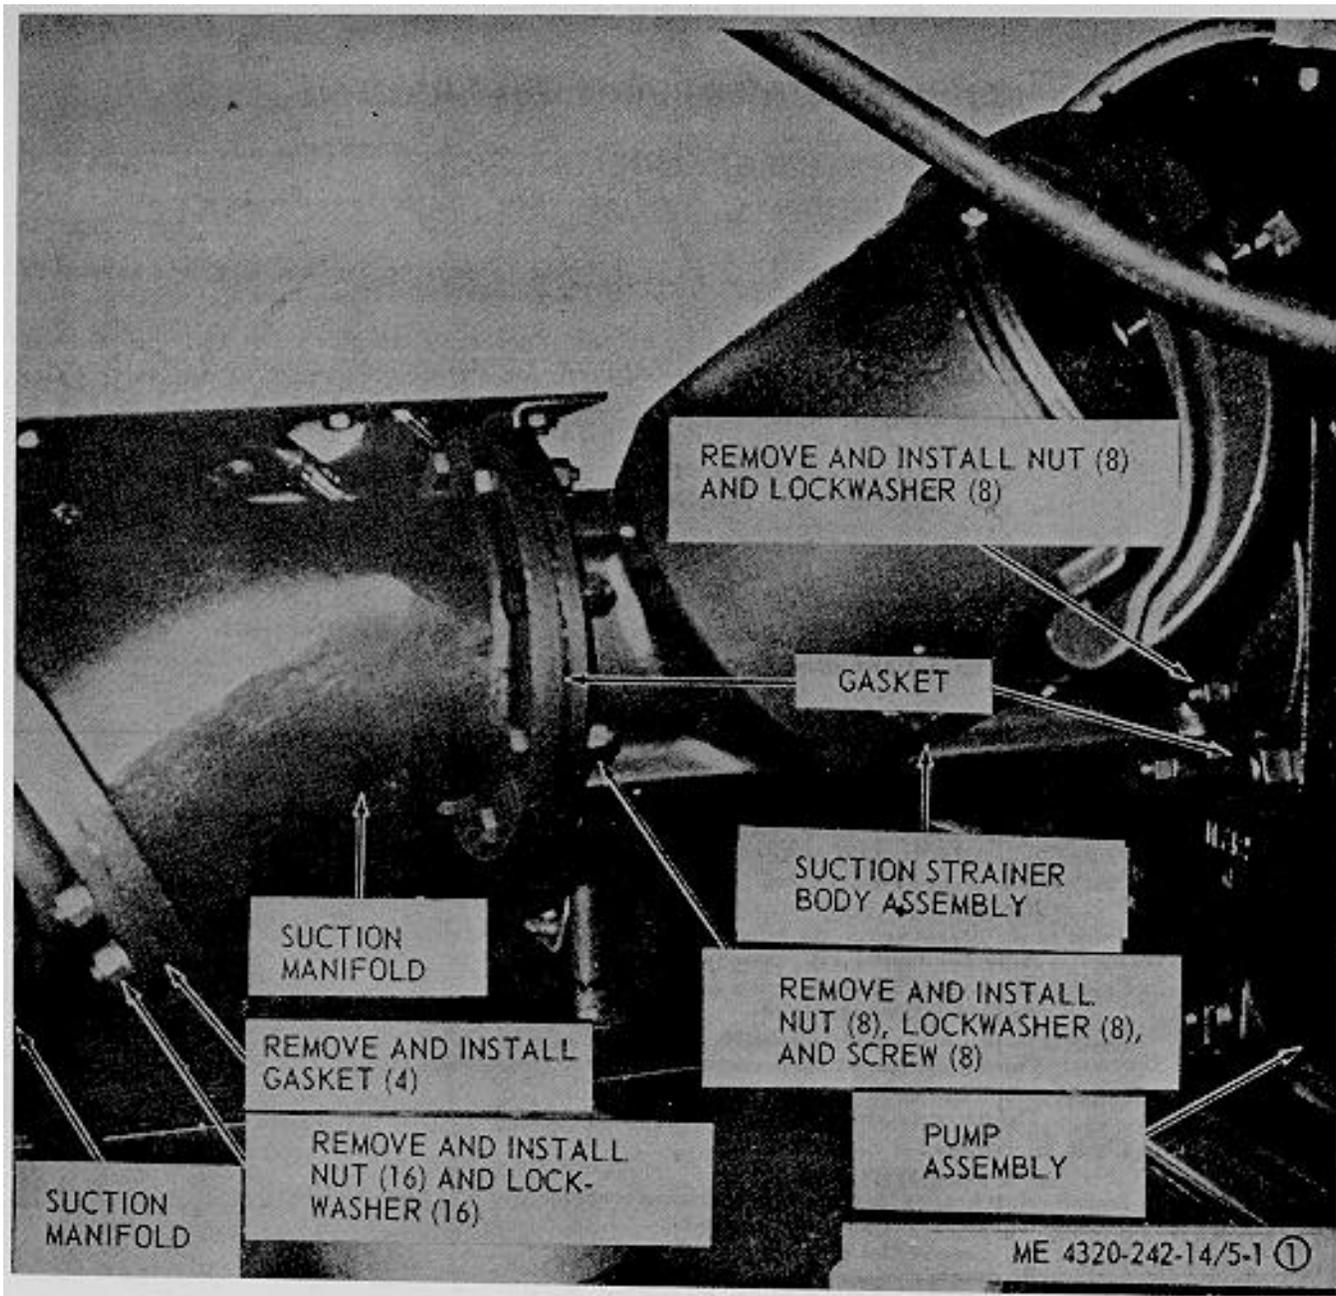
Suction manifold and strainer body assembly. removal and installation. Model 84C15-A0484, serial numbers 371201 through 415493 and Model US36ACG, serial numbers 37044-001 through 37044-240. (Sheet 1 of 2)
